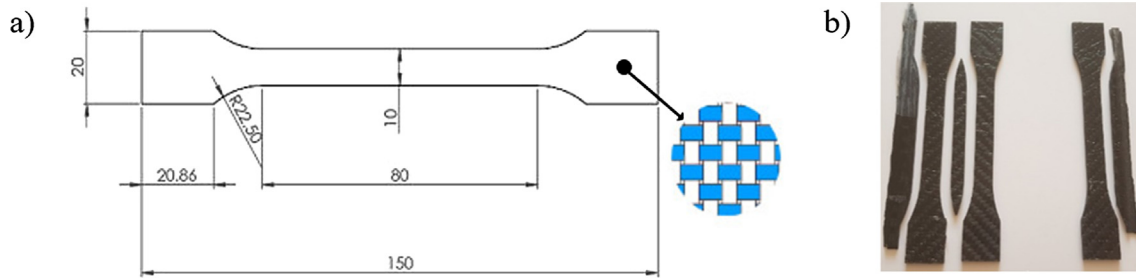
Manufacturing process: a) dimensions of the tested specimens in mm and; b) image of the specimens.
